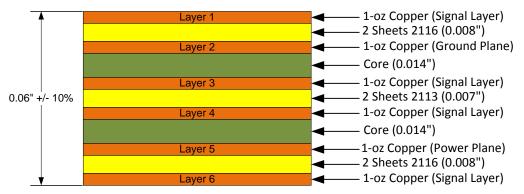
Typical Six-Layer PCB Stack with Routing Assignments
